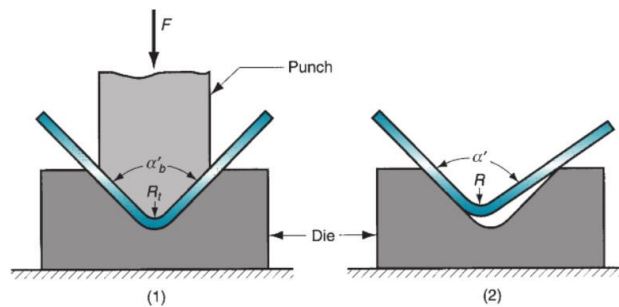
Springback in sheet metal bending (Grover & Groover, 1996)
